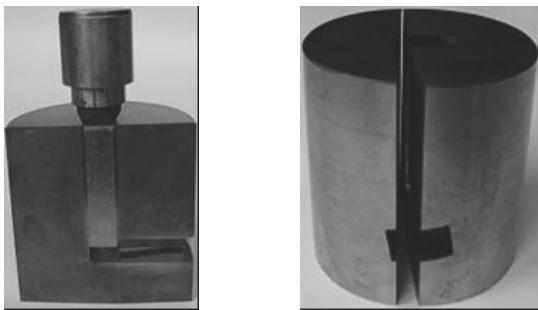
Tool for ECAP method application screw sections on horizontal part
